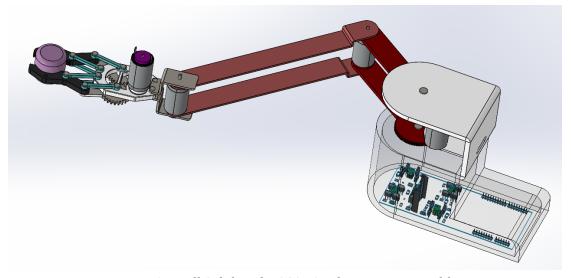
Full Solidworks SCARA robotic arm assembly
